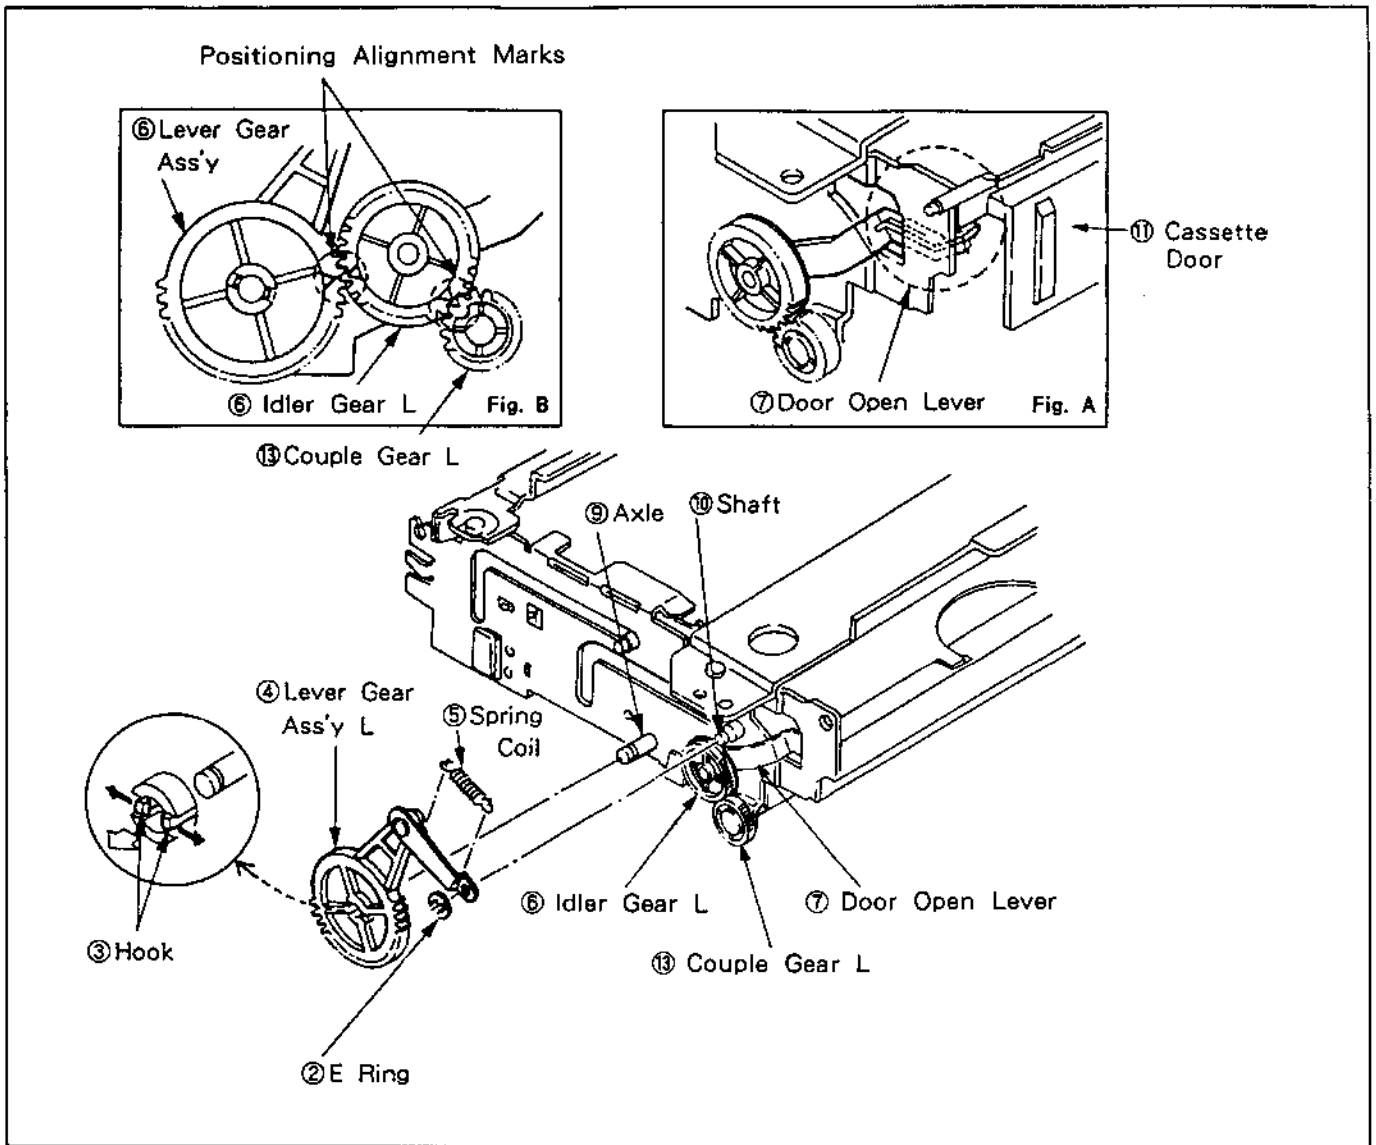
Cassette Drive Gears (Left Side)
